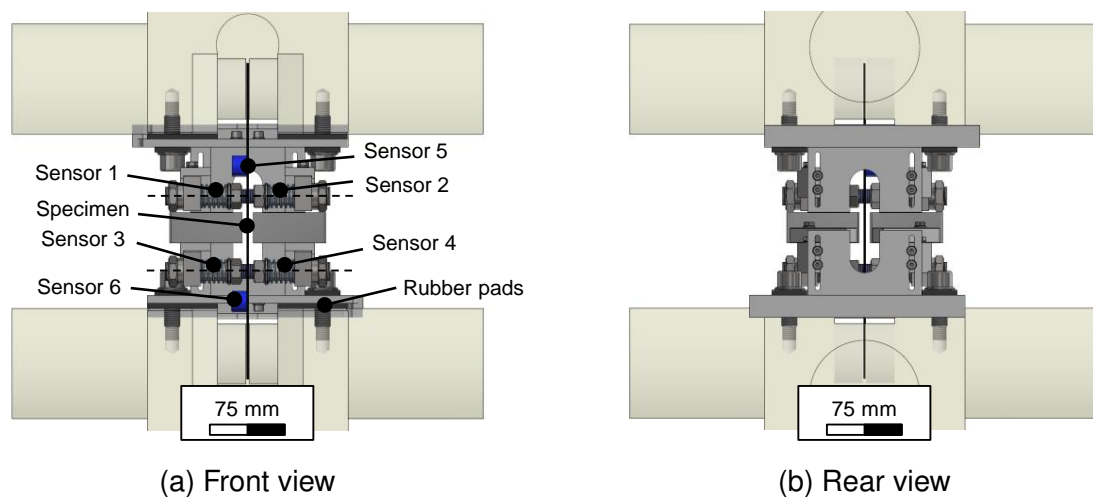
Front (a) and rear view (b) of the fixture for stage 3 experiments.
